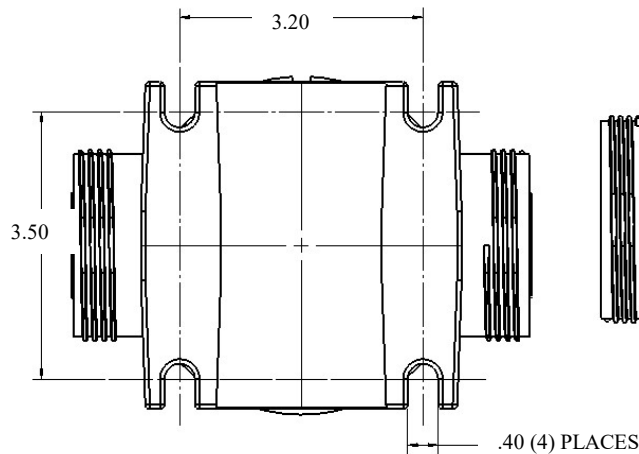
SB-Series base mounting pad (bottom view) – 1/2" thru 1".
